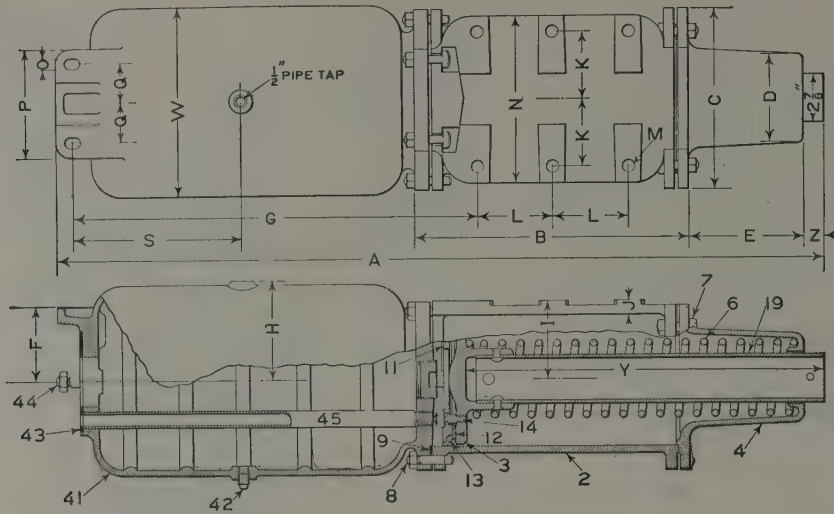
Combined Brake Cylinder and Reservoir for Freight Cars.
